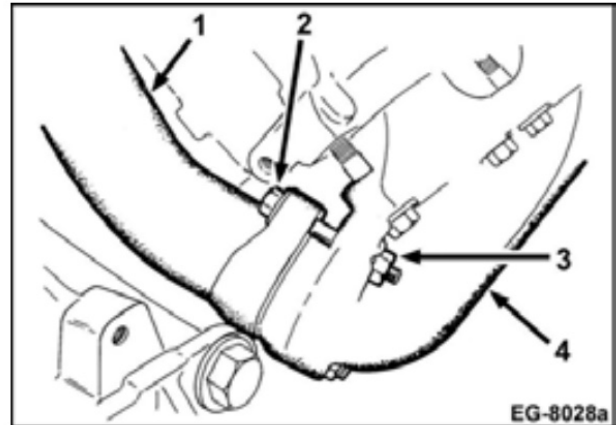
Turbocharger Exhaust Tube Mounting Hardware (Right Side Shown)
